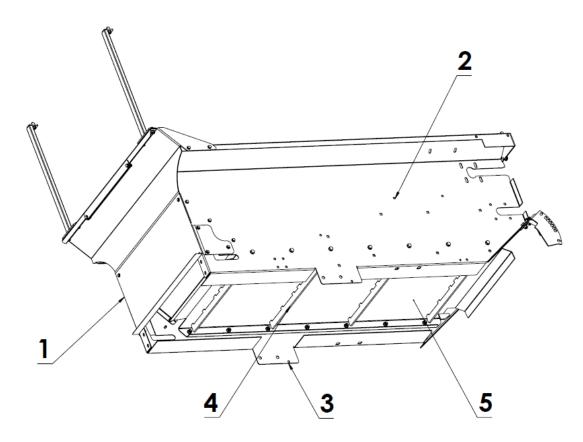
Cargo box along with components 1 – front wall; 2 – left wall; 3 – right wall; 4 – floor panel; 5 – cross-bar
